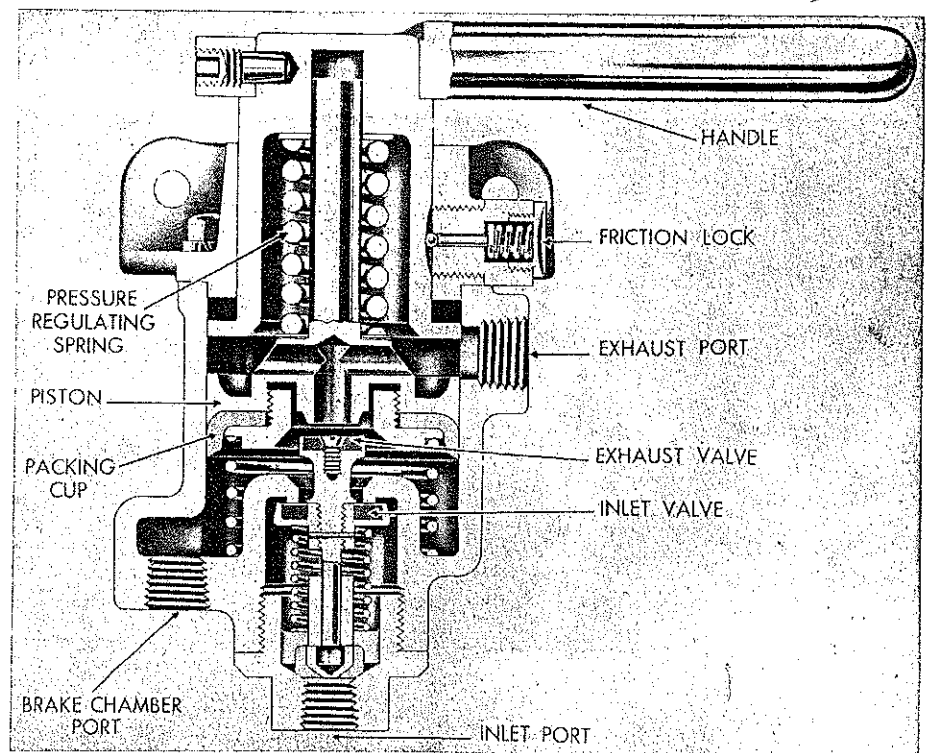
Sectional view of Type HP Hand-Operated Brake Valve
